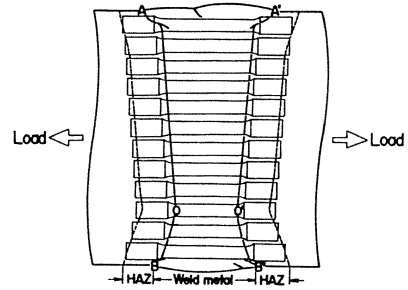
Analogy of weld metal zone to assembled bar specimens
